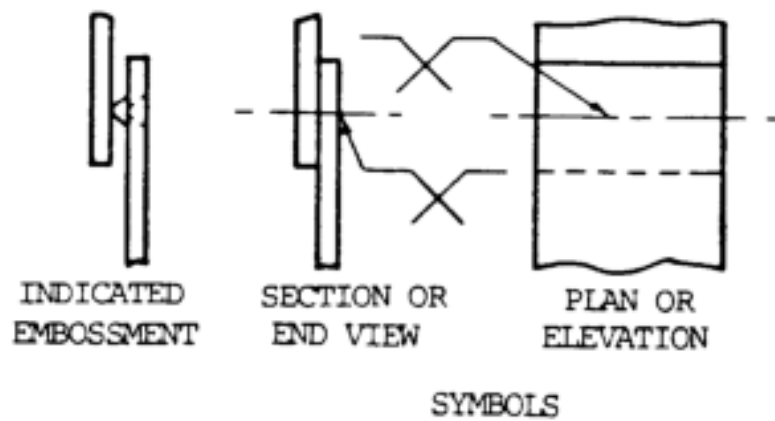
Embossment on arrow-side member of joint for projection welding.
